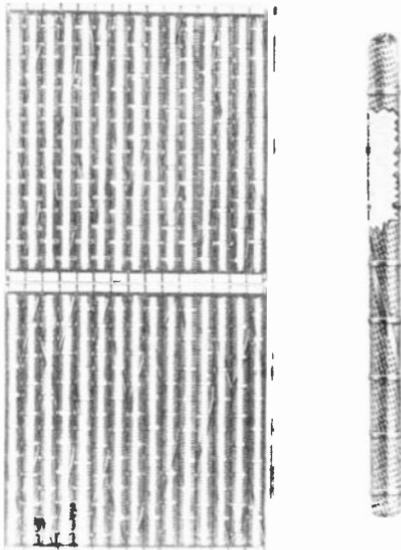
(Left) Assembled positive plate of an Edison cell. (Right) Single tube cut away to reveal internal construction.
